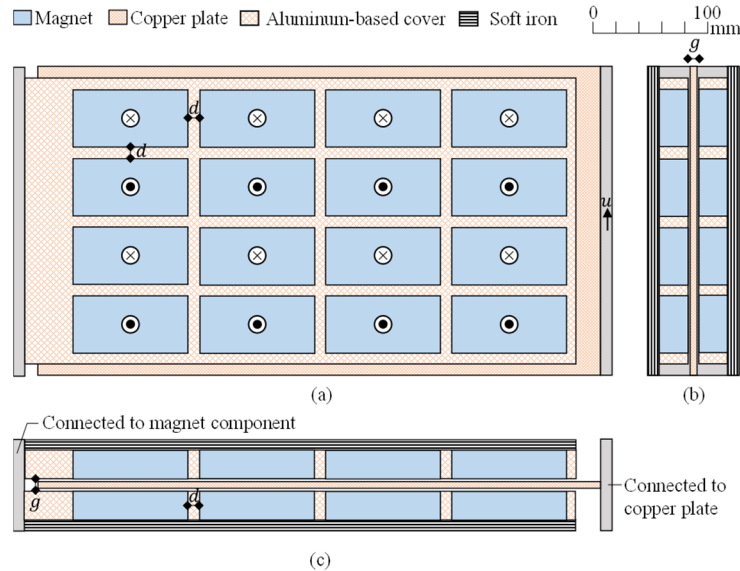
Schematic drawing of the proposed plate-type eddy-current damper with high energy-dissipation: (a) elevation view; (b) plan view; (c) cross-sectional view
